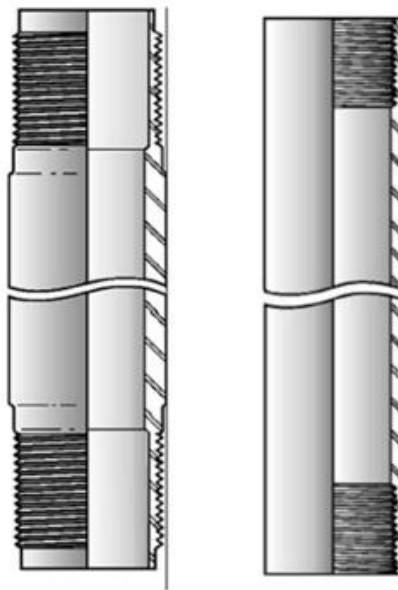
Heavy Wall Barrel with Pin End (left) and Thin Wall Barrel with Box End (right)
